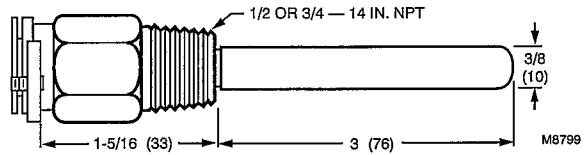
Approximate boiler fitting and bulb dimensions in in. (mm) for L4006C and L6006B.
